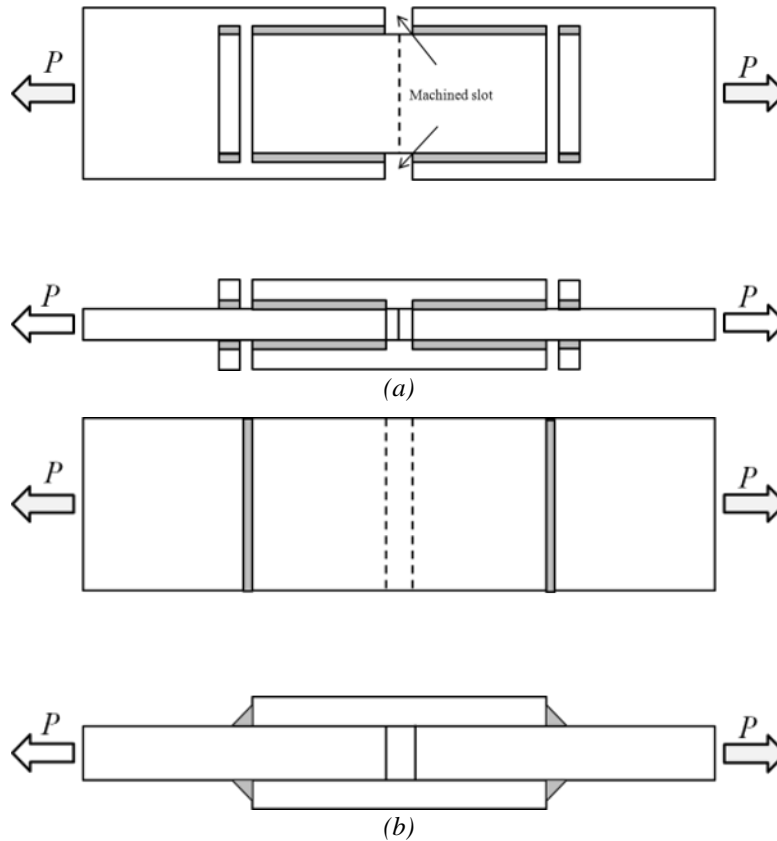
Standard fillet weld shear strength specimen: (a) longitudinal shear loaded; (b) transverse shear loaded
